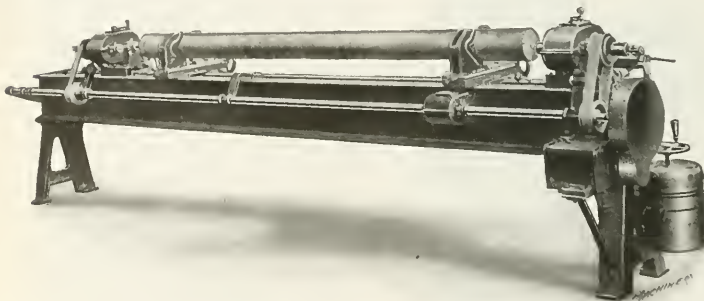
Opposite Side of Pawling & Harnischfeger Centering Machine shown in Fig. 1
